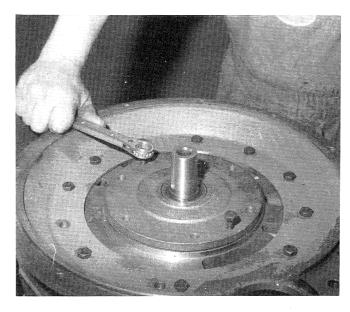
Using Pusher Screws to remove Input Bearing Support.
